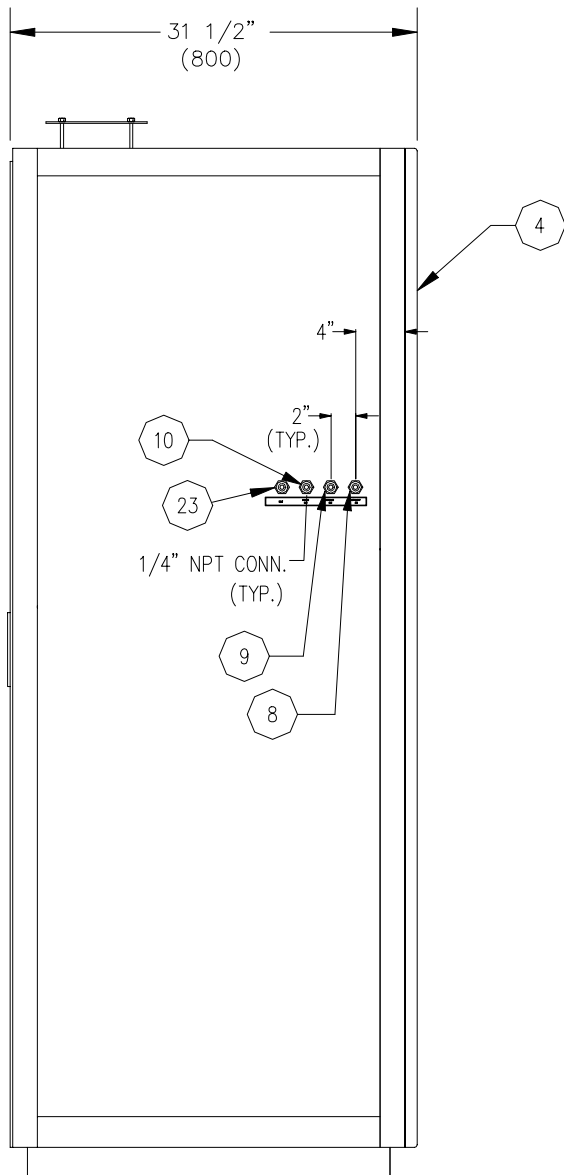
B – GA500 – Gas Analyzer Equipment Drawing
